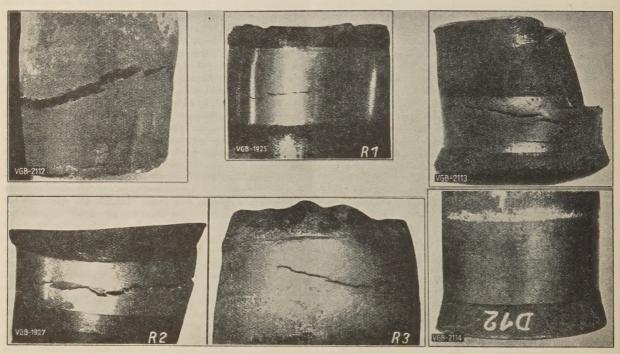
TUBE ENDS WITH CIRCUMFERENTIAL CRACKS
